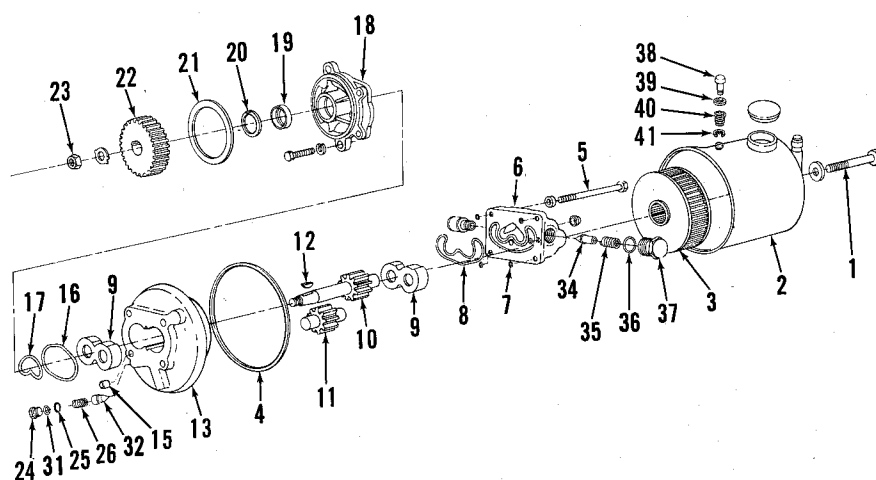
Exploded view of power steering pump used in Models 8700, 9700, TW10, TW20 and TW30.
